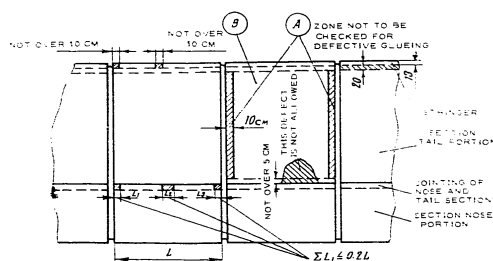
TOLERABLE DEFECTS IN BLADE GLUED ATTACHMENTS.
